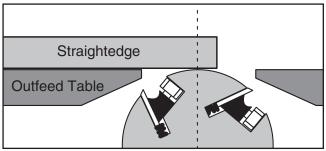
Adjusting outfeed table even with cutterhead body (knife-style cutterhead shown).
